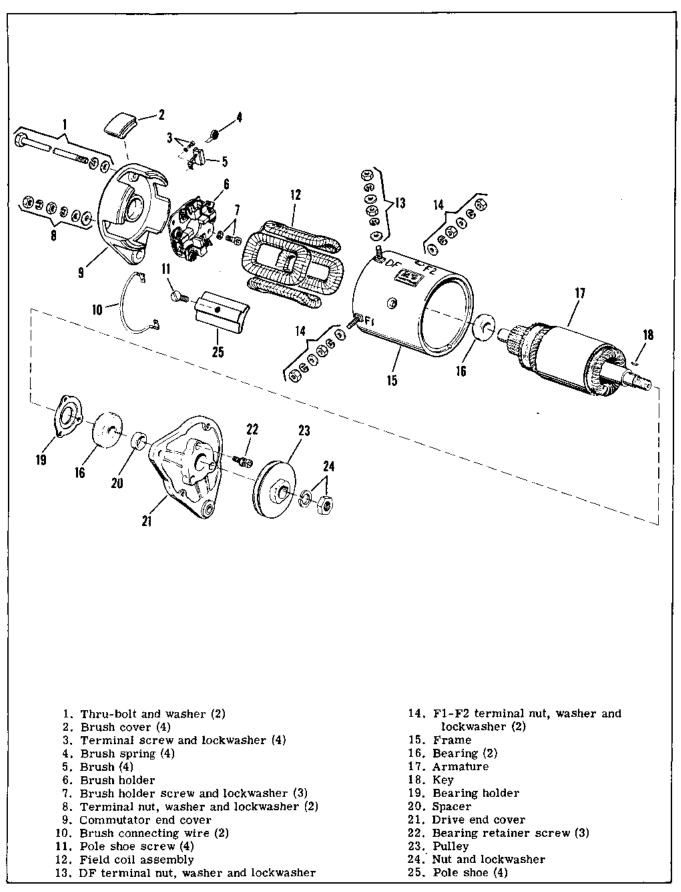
E-27I, HITACHI Starter-Generator - Exploded View
